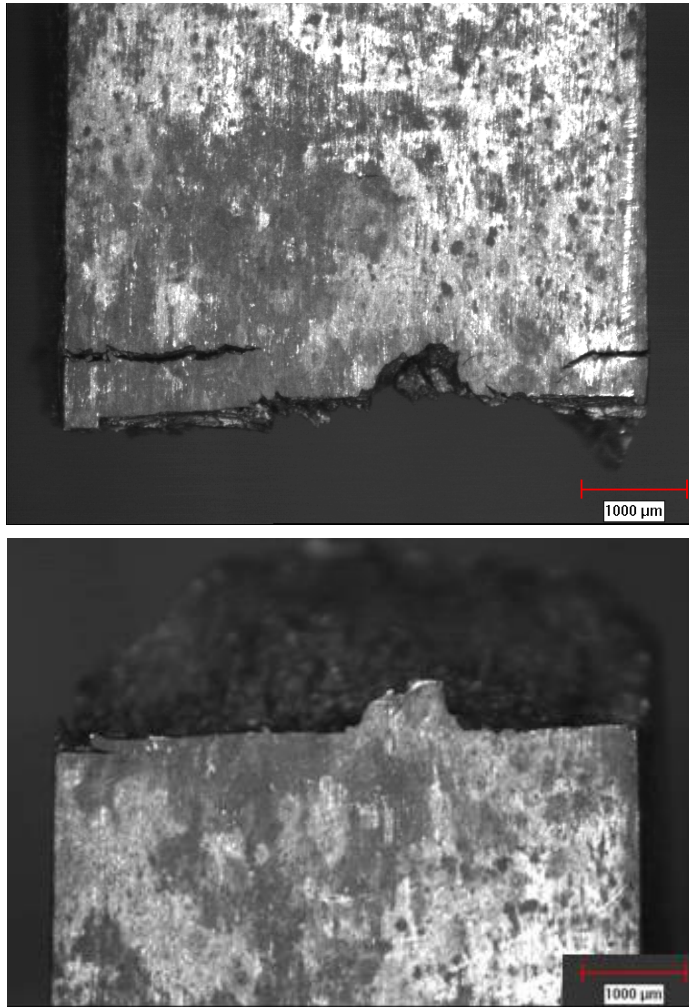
Top view (fusion zone side) of fractured 0.2% mechanical strain Inconel 738 specimen
